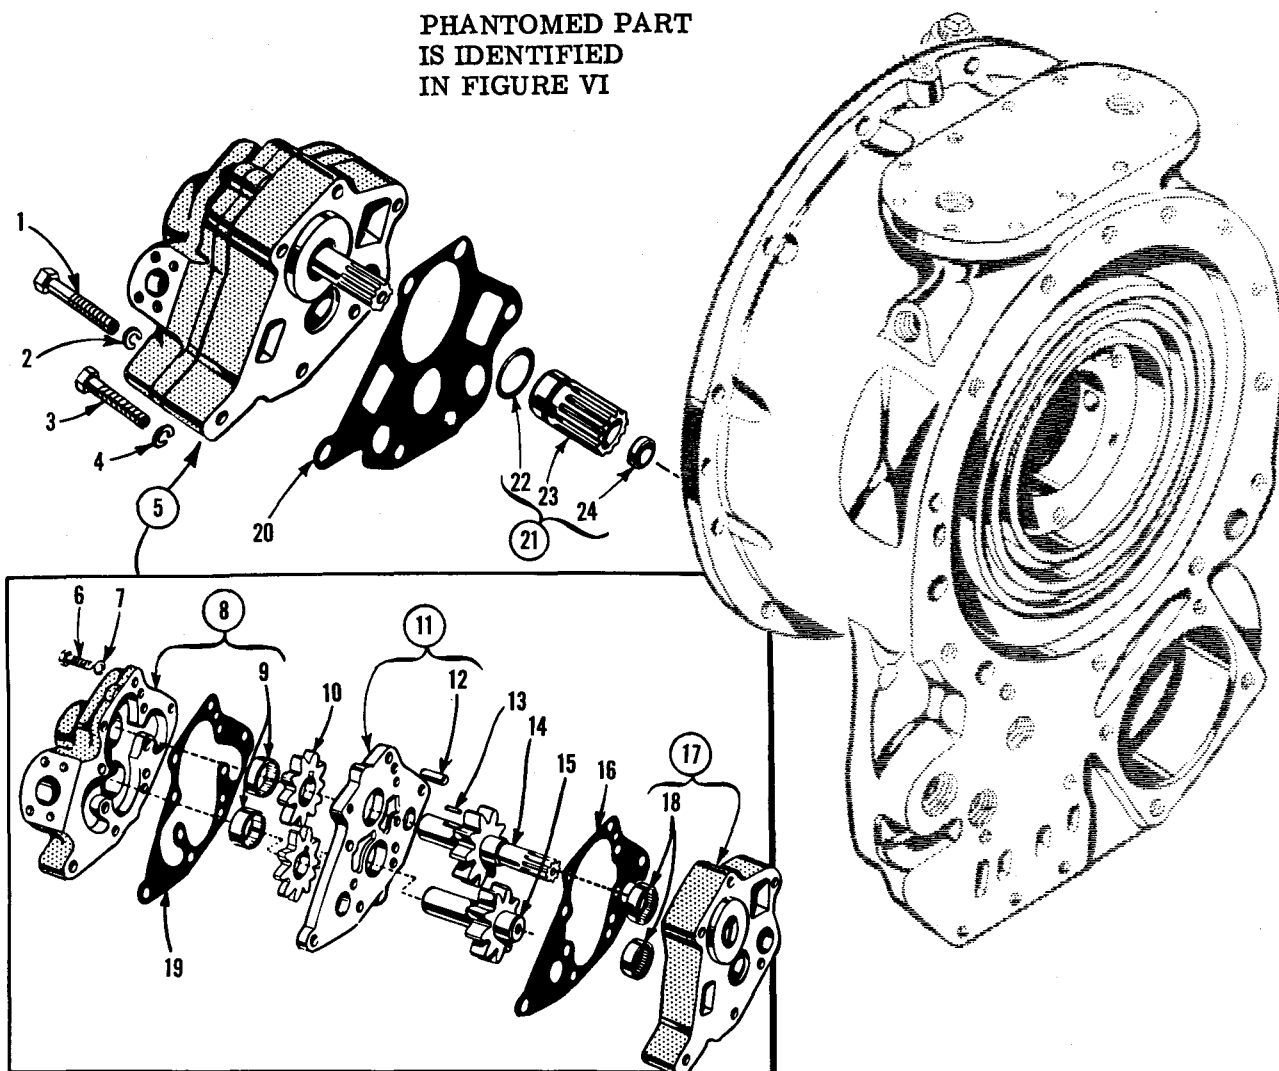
INPUT-DRIVEN CHARGING OIL PUMP, EXPLODED VIEW
